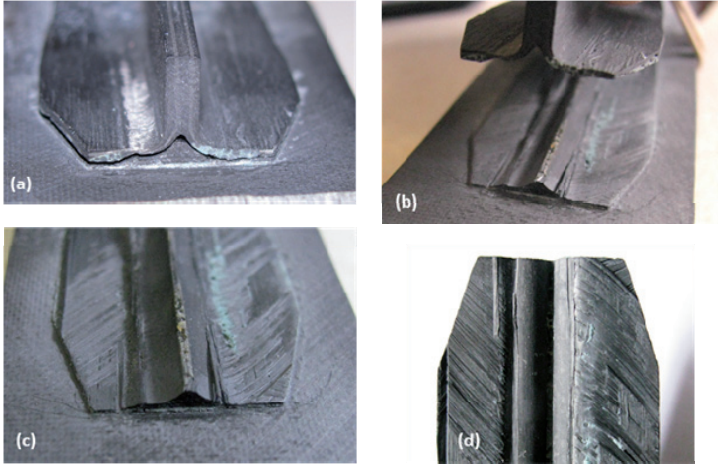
(a) Front view of failed specimen; (b) Exploded view showing the failed area; (c) Front view of bottom part showing 0° plies ; (d) Bottom view of the upper part showing delaminated 45° plies
